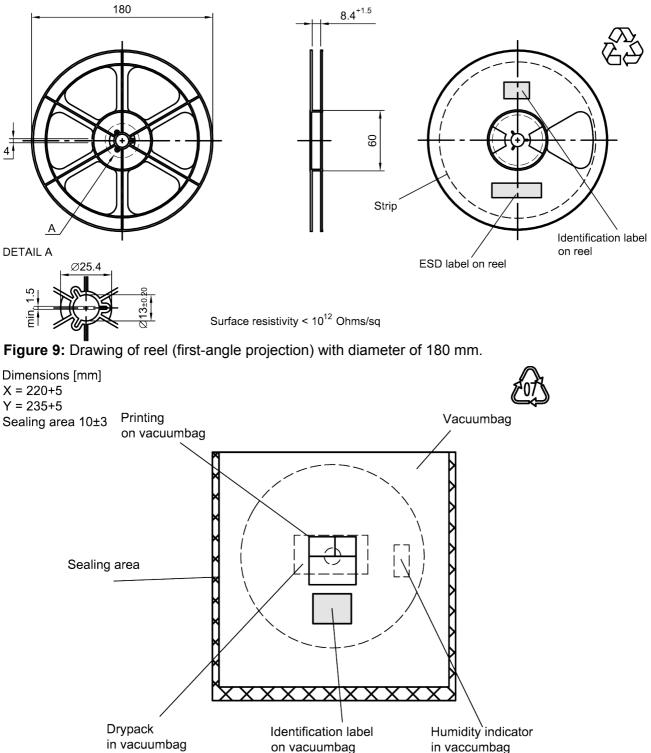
Drawing of moisture barrier bag (MBB) for reel with diameter of 180 mm.
